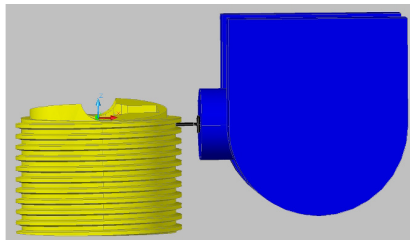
Machine head in working position on the surface described by the interior diameter of the trapezoidal thread
